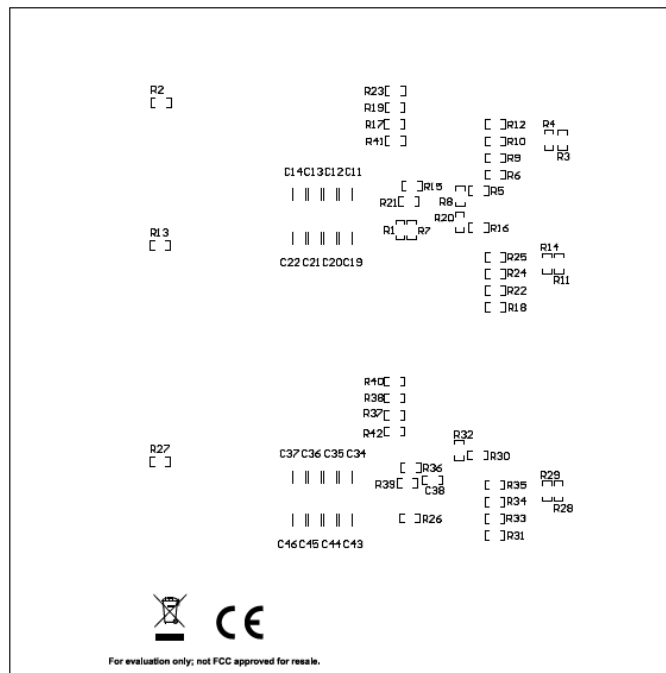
Bottom-Side Component Layout (Bottom View)
